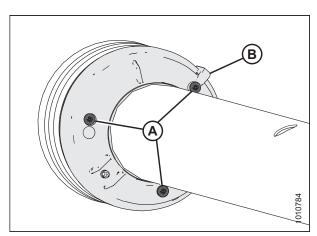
Phillips Head Screws Installed in Base Cone
